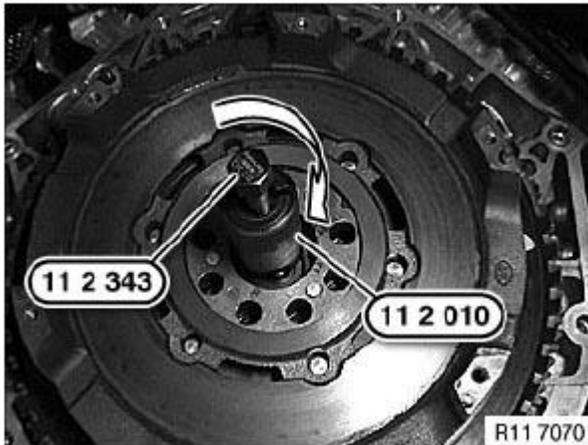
Twisting Roller Bearing With Special Tool 11 2 343
